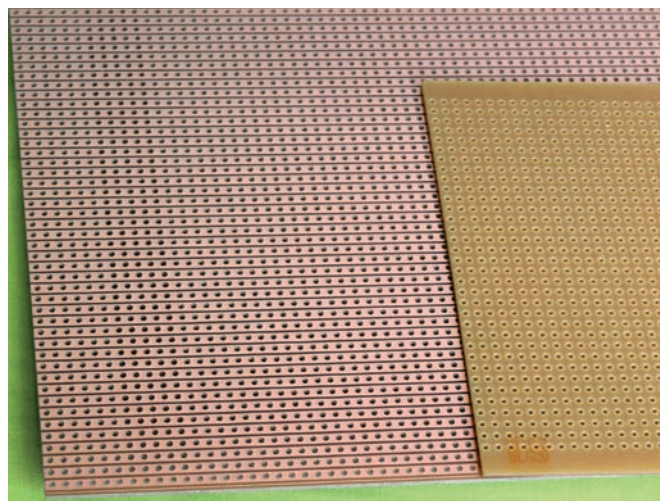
Stripboard has a matrix of holes with copper strips on one side of the board. It is usually necessary to make breaks in some of the strips, either using a special tool, or a drill bit of about 5mm in diameter, which does the job quite well
